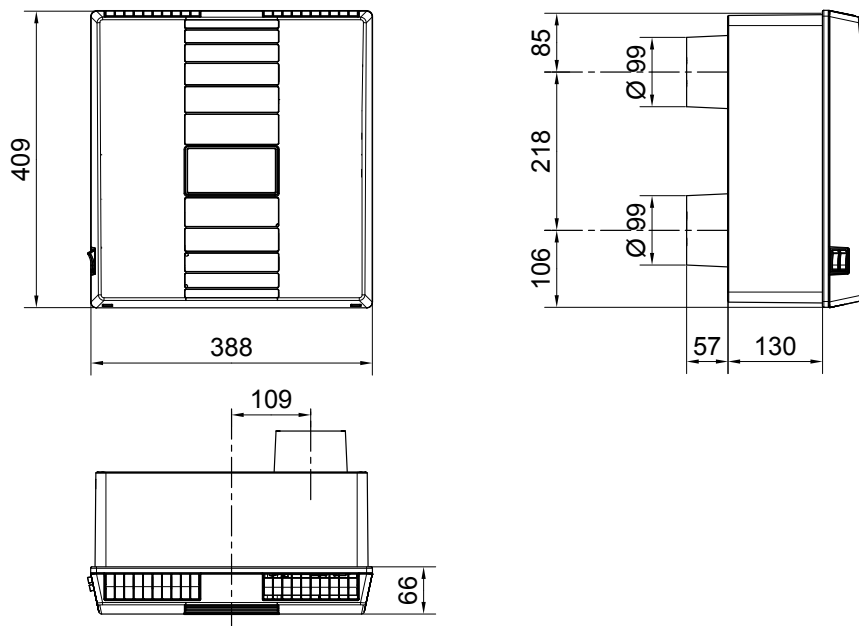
Dimensions of the M-WRG-K and M-WRG-K/FC ventilation units, in millimetres
